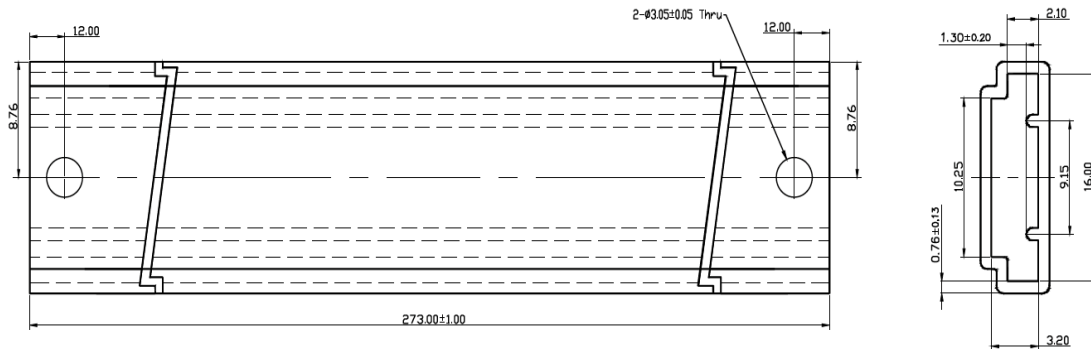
Tube dimensions for L2C5-xxxx1202x06Px.
